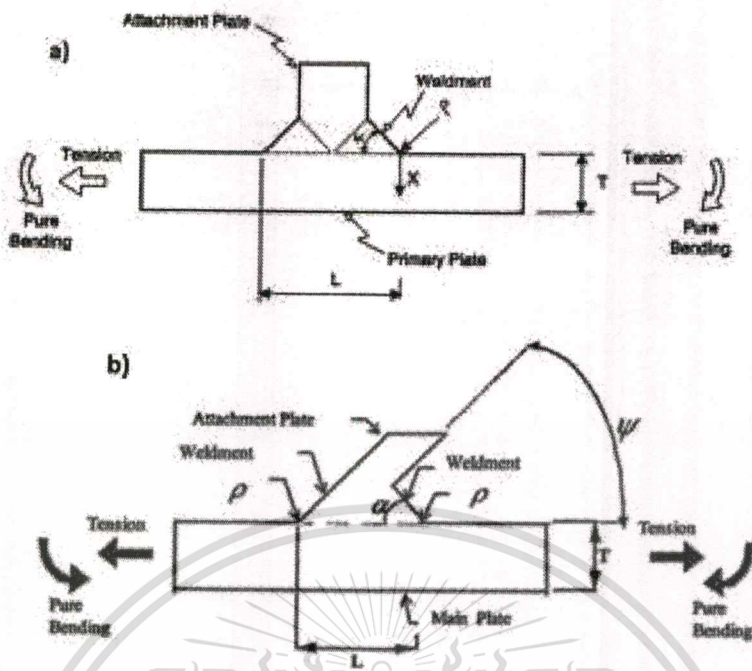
a) Geometry of T-butt joint; b) Geometry of skewed T-butt joint (Brennan et al., 2000).
